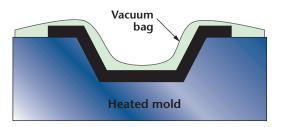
Vacuum bag molding can apply pressure to both very large and very complicated shapes. It is used in both manufacturing and repairing composites.
